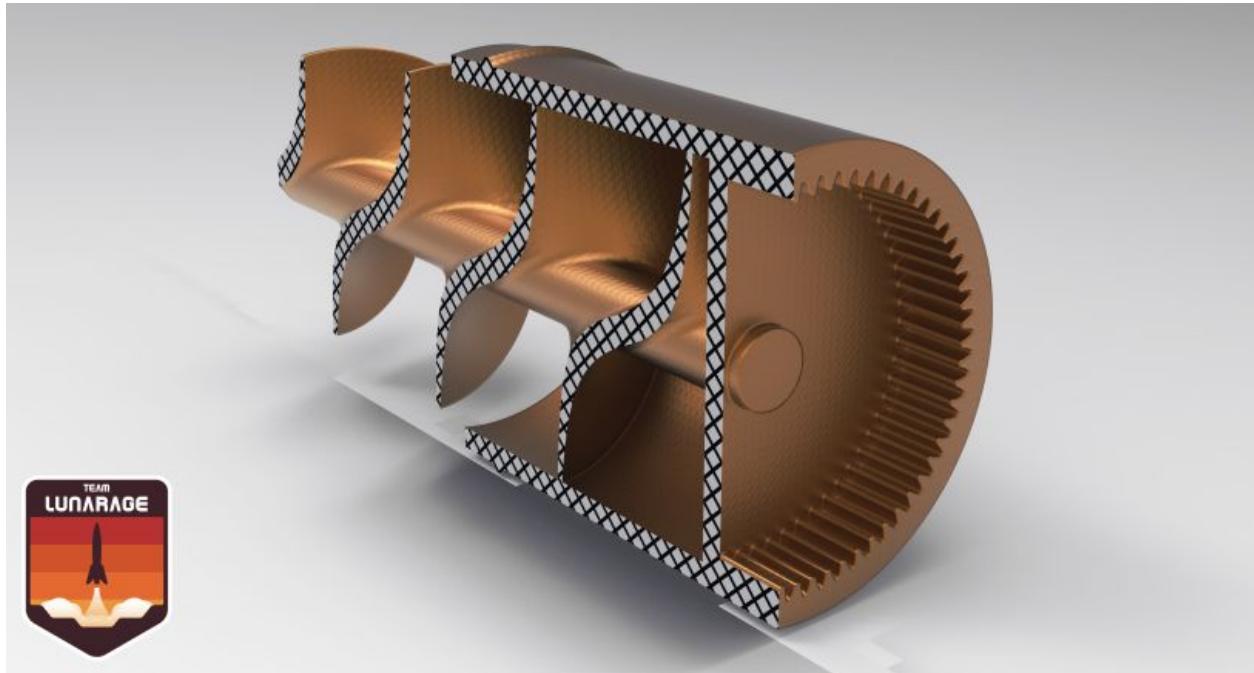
Technical drawing of replaceable Archimedes screw module.
